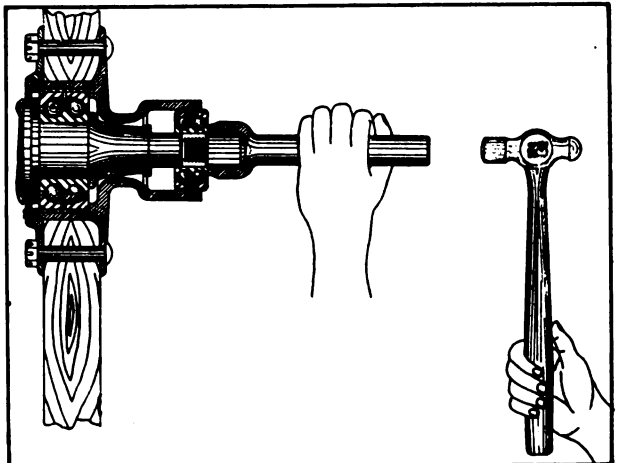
Showing How the Blows of Hammer May Be Distributed Evenly with Tubular Tool.
